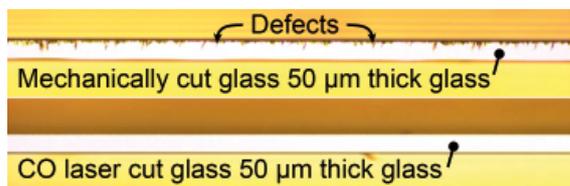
CO laser cutting of 50 μm thick glass produces no cracks or defects as compared with traditional mechanical cutting.
